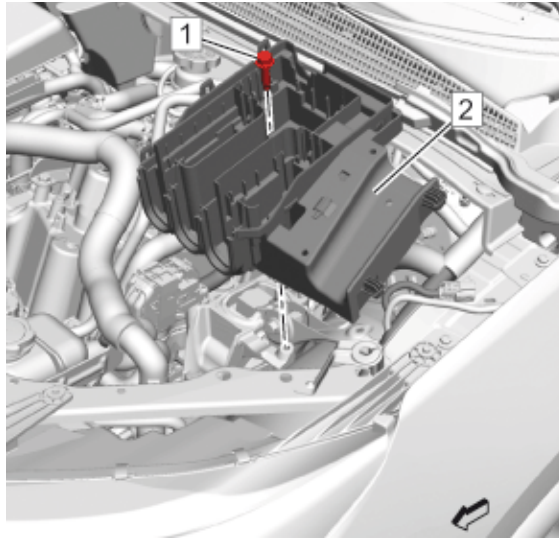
Engine Wiring Harness Fuse Block Bracket And Bolt
